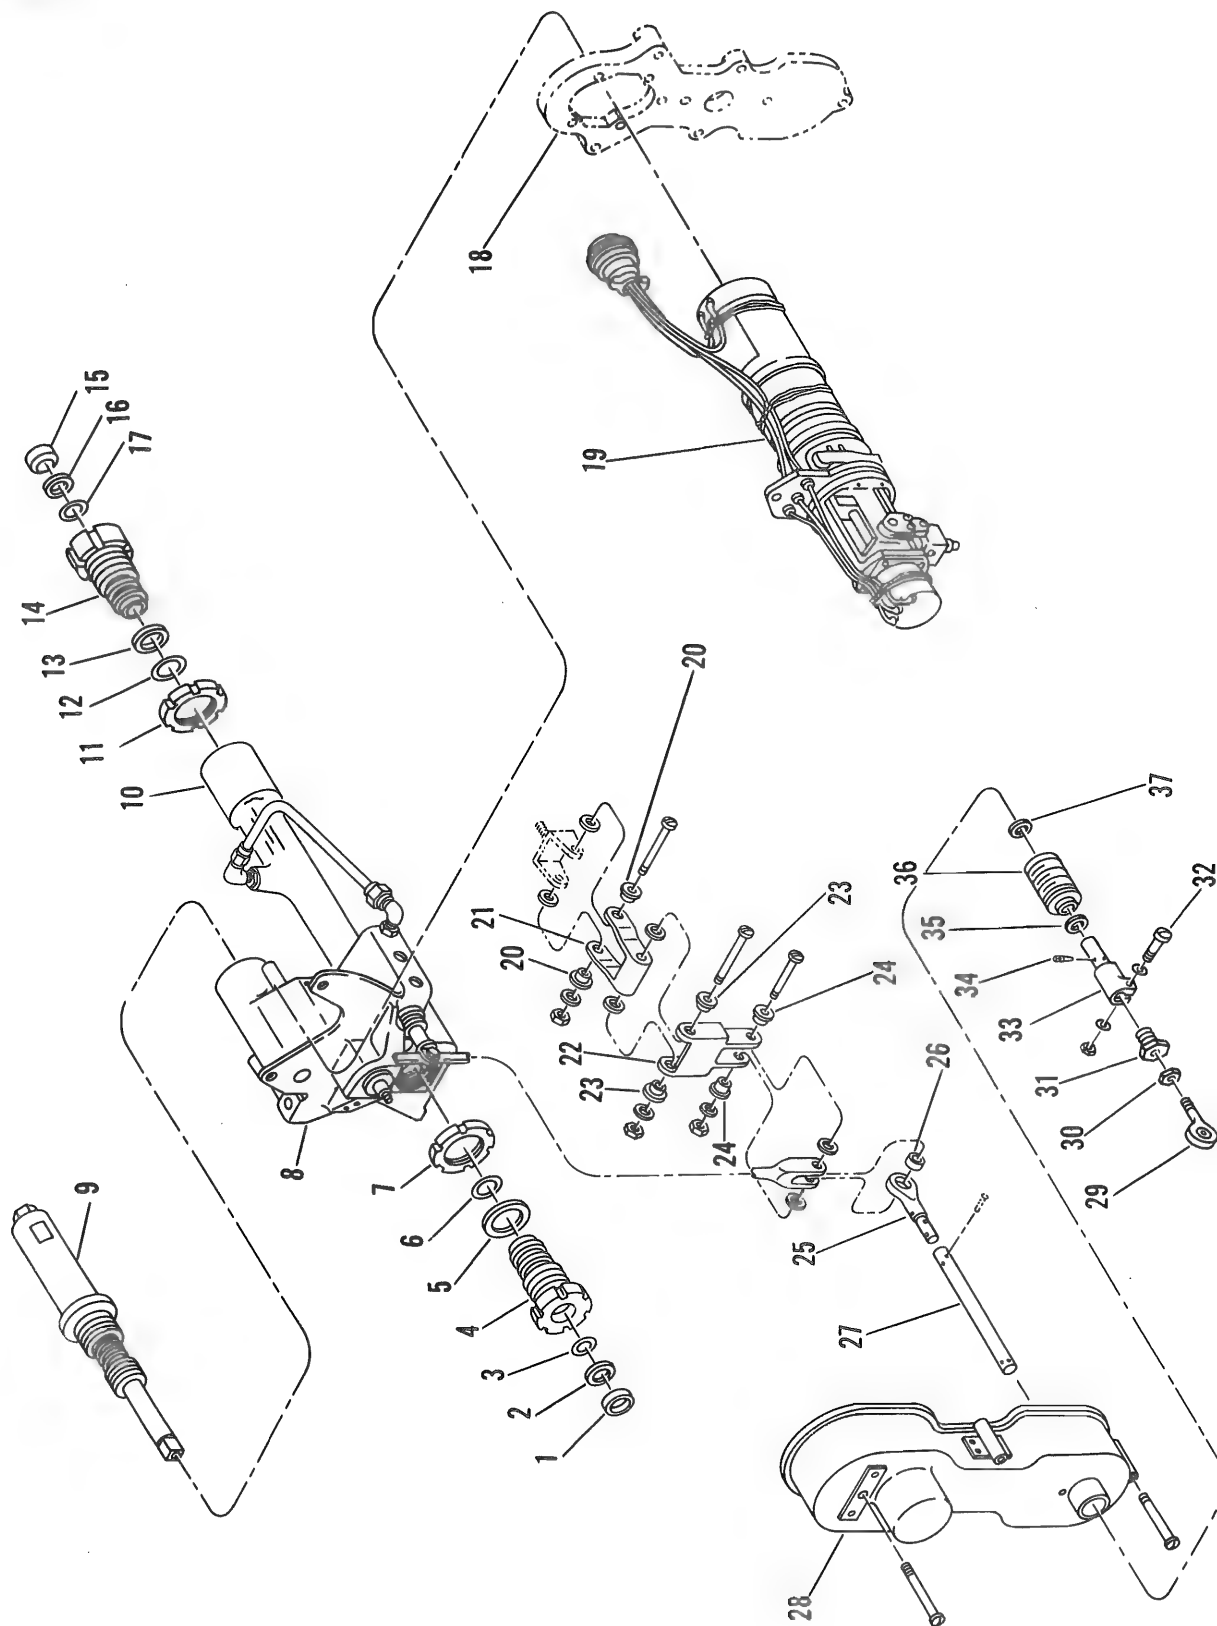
Tail Rotor Servo Unit Assembly Disassembled (Sheet 1 of 2)
